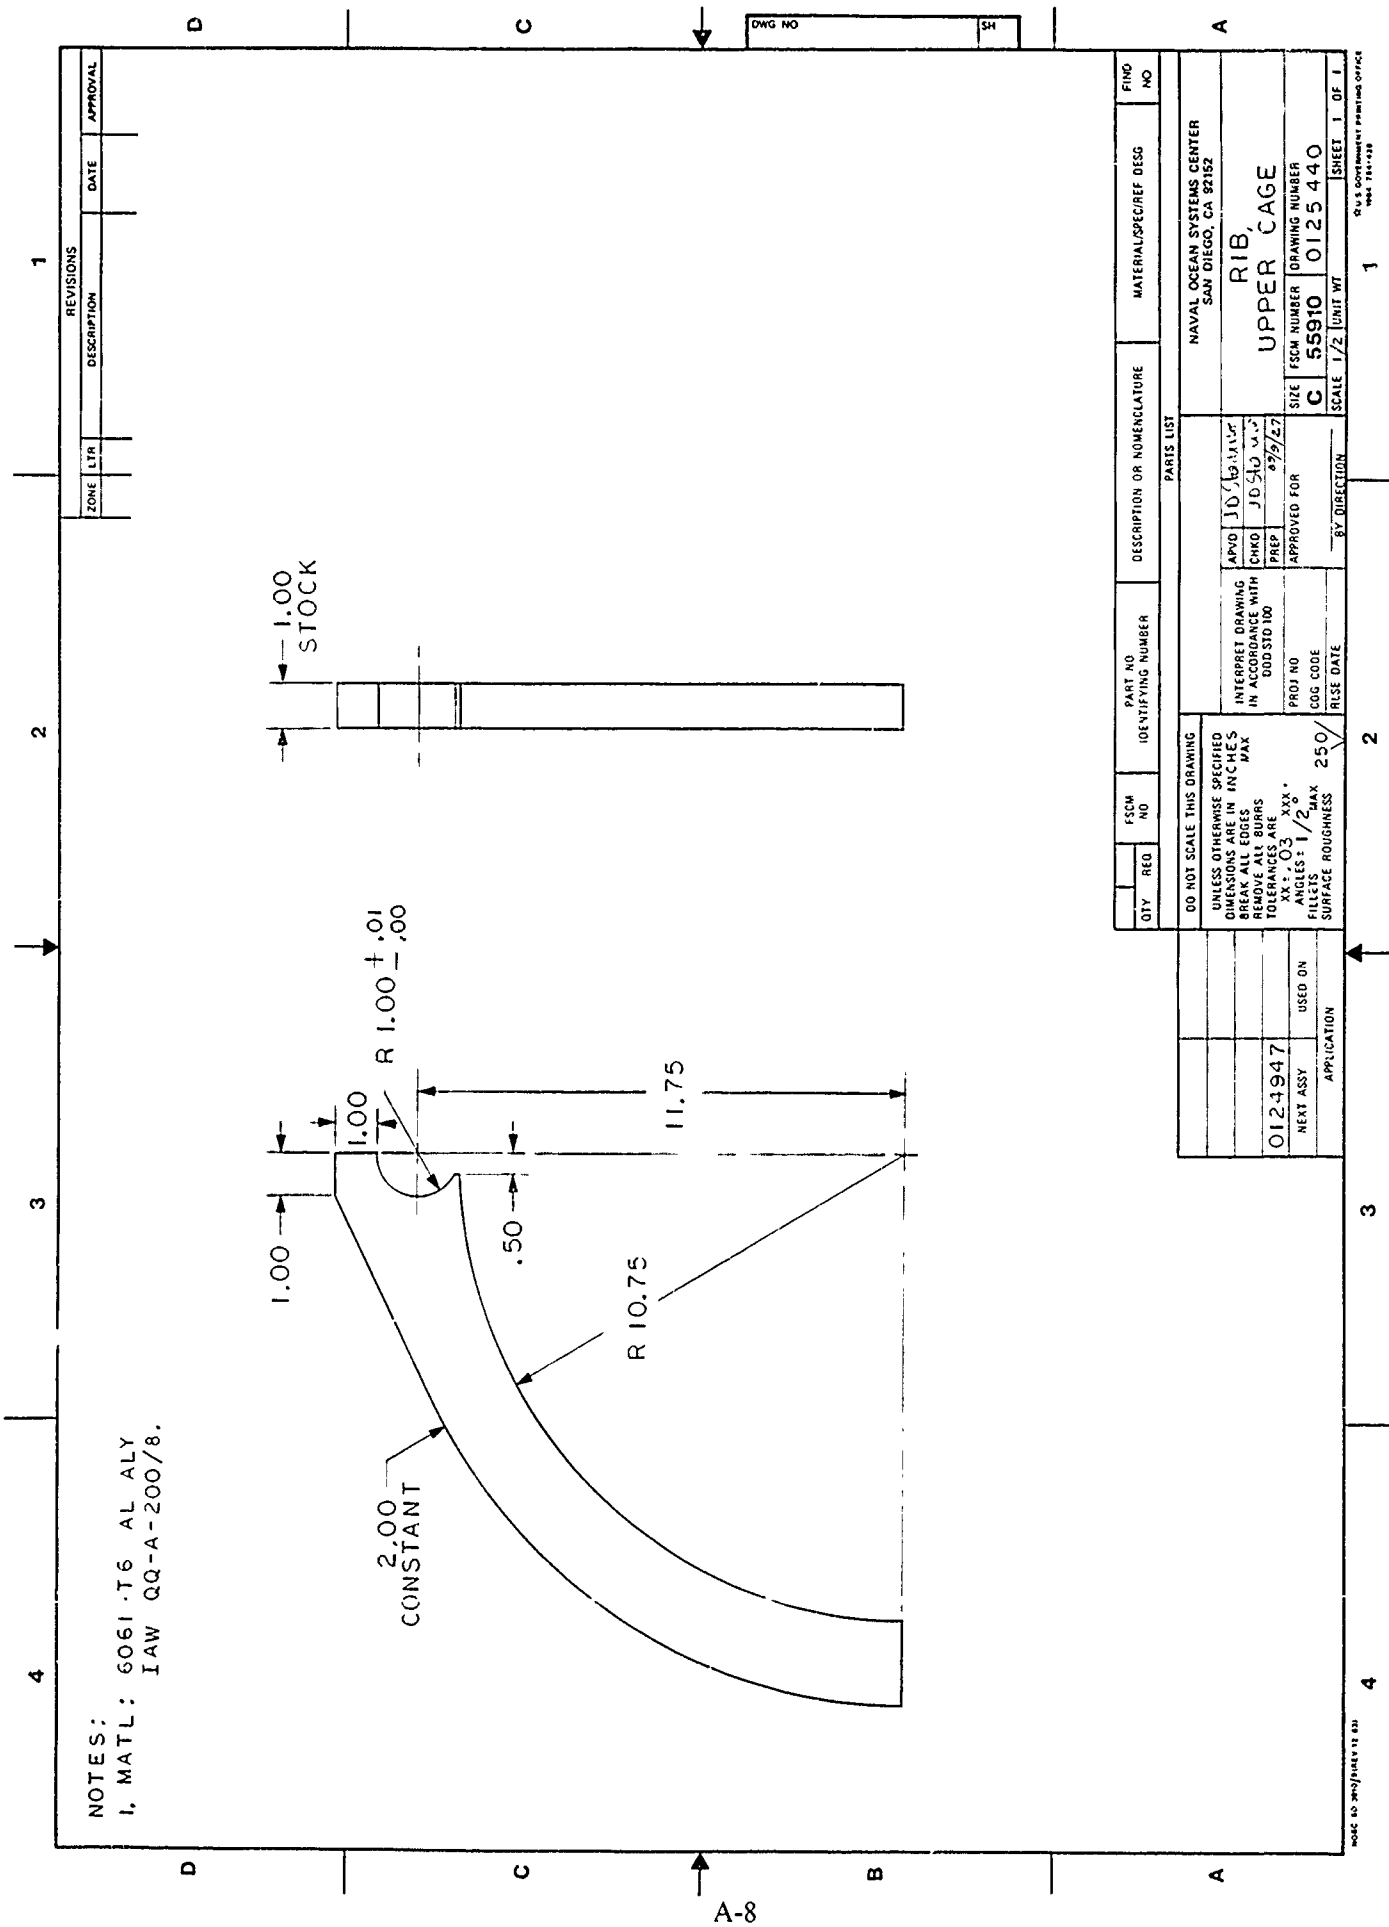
Fabrication drawing of lifting cage; rib detail.
